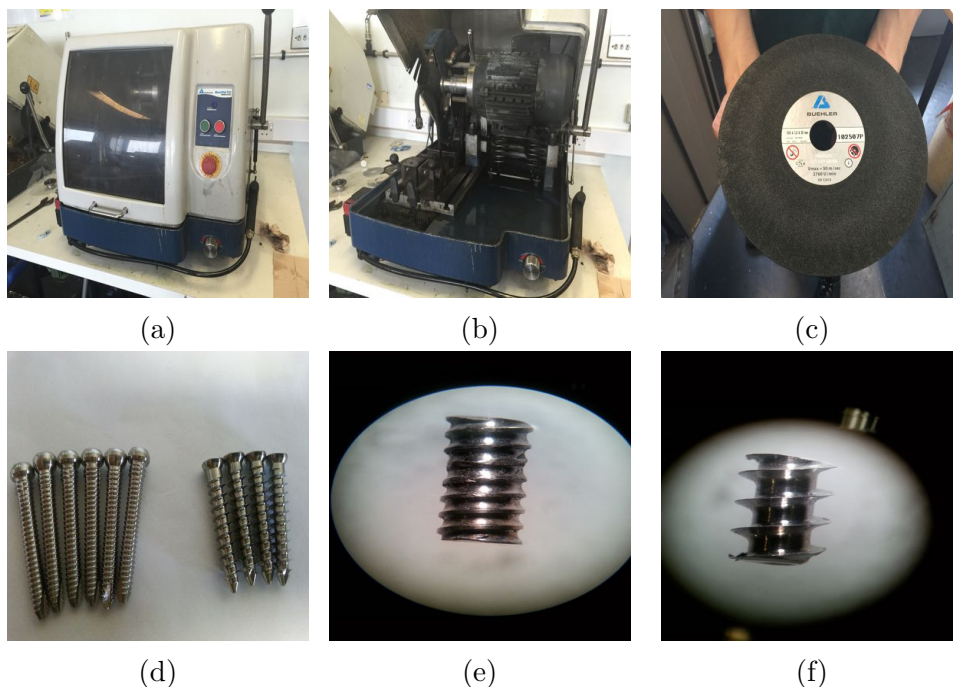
Cutting Titanium Screws (a) AbrasiMet 250 chop-cutter (b) Interior view of AbrasiMet 250 chop-cutter (c) 102507 P premium cut-off wheel (d) Cortex and Osteopenia screws prior to cutting (e) Cortex screws after cutting (f) Osteopenia screw after cutting
